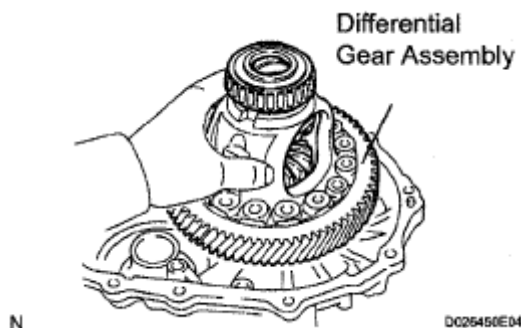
Installing Differential Gear Assembly To Transaxle Case
